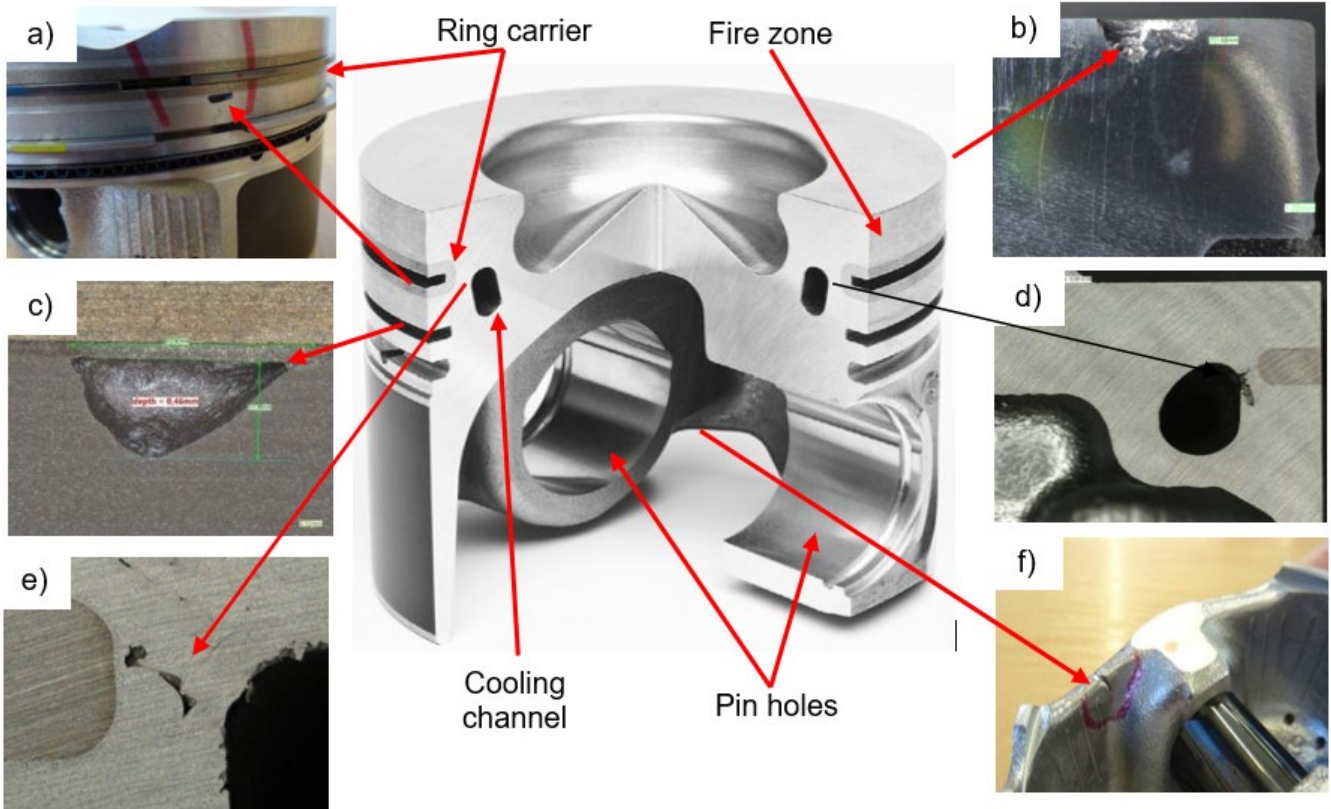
External and internal view of the piston and the most common defects: a) hole under the ring insert; b) mechanical damage to the piston crown; c) void beneath the ring groove; d) void between the ring insert and cooling channel; e) porosity between the insert and cooling channel; f) crack in the piston pin area
